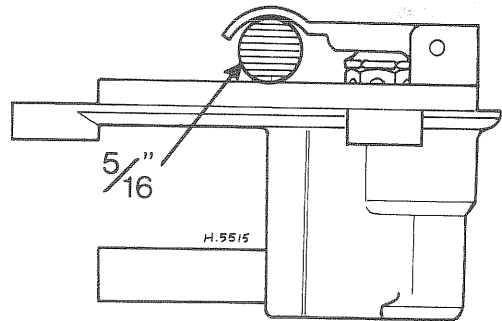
Method of setting the correct clearance of the float lever – early carburettors (Sec 18)
